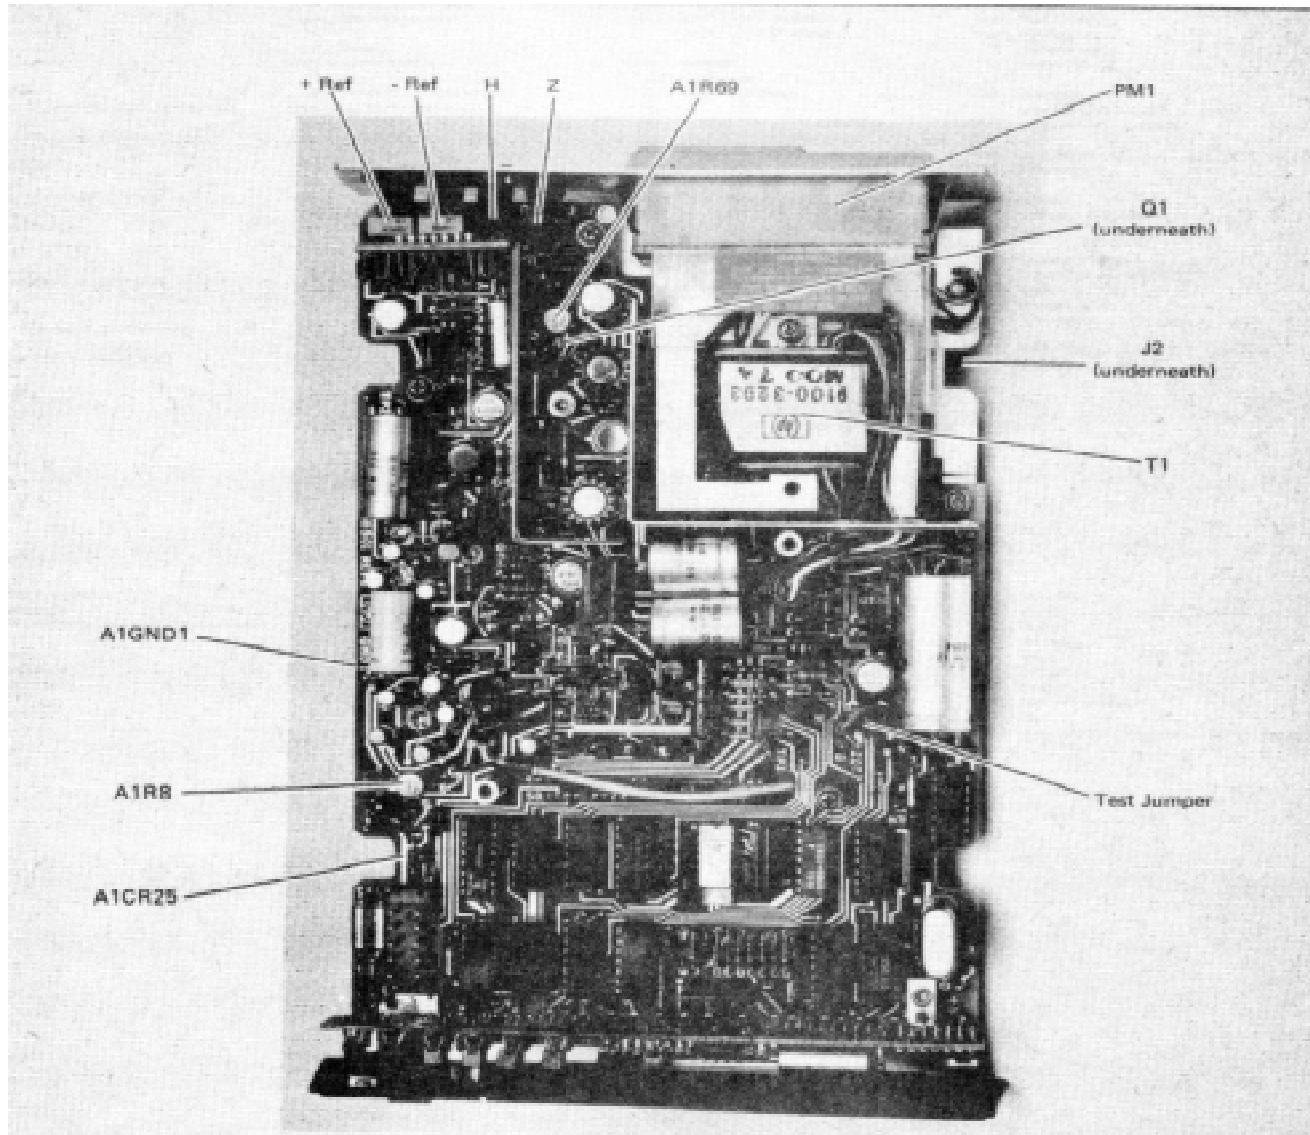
Chassis Mounted Component and Adjustment Locator.
